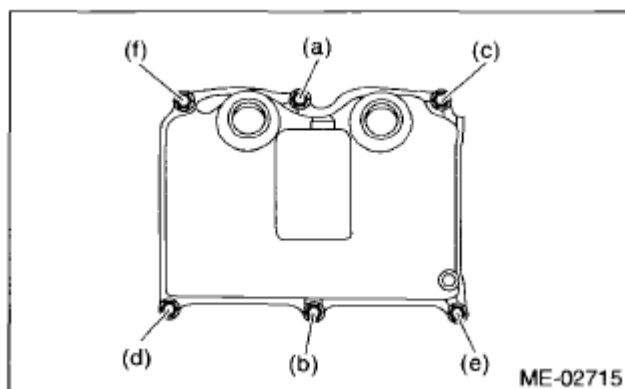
Identifying Rocker Cover Bolts - RH Side Tightening Sequence
